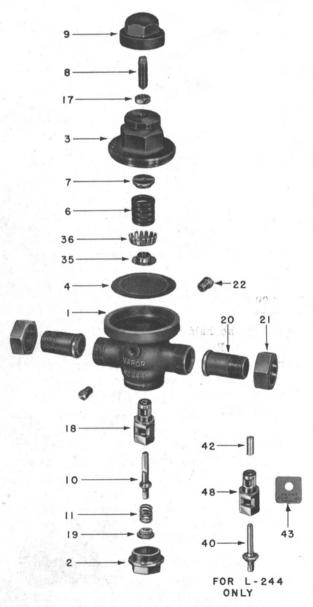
Exploded View of No. 244 Pressure Regulating Valve
